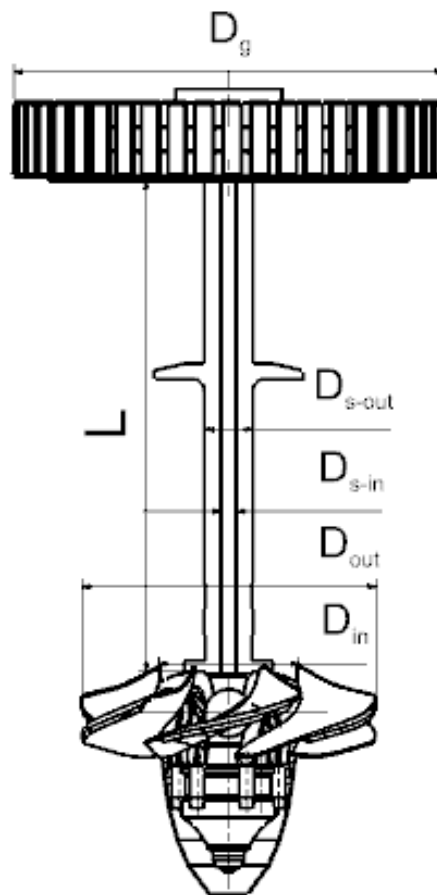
Main dimensions of the prototype Kaplan turbine.
